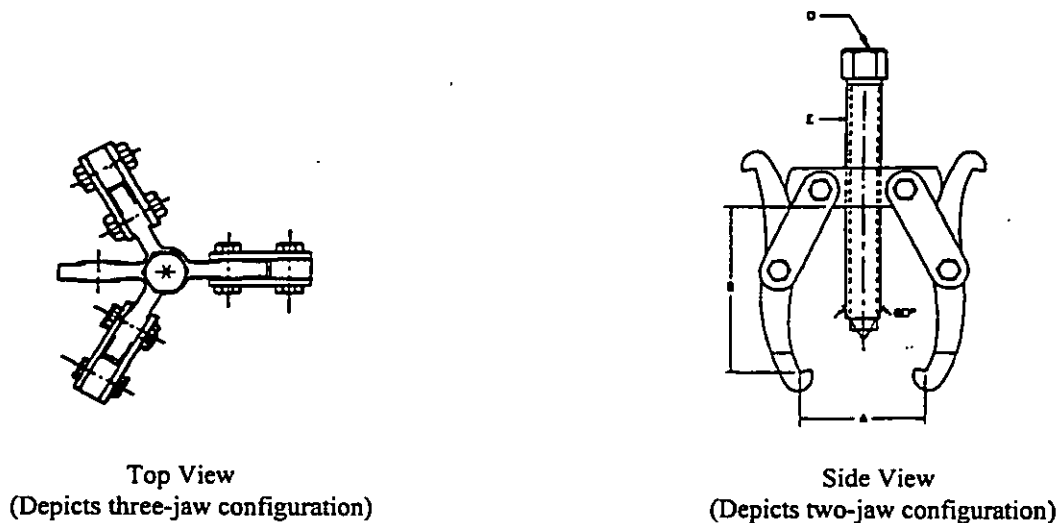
Type I, class 7, style B puller, mechanical, gear and bearing, two-jaw/three-jaw external, combination. (See Table II for size specification.)
